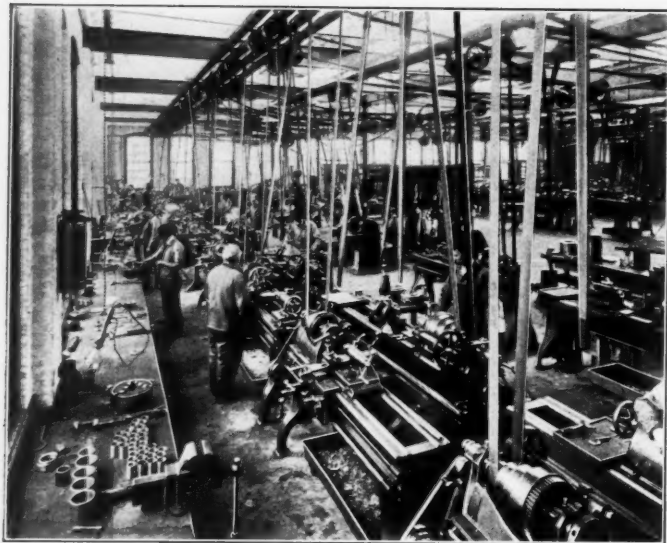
General View in New Machine Shop of Standard Roller Bearing Co.
